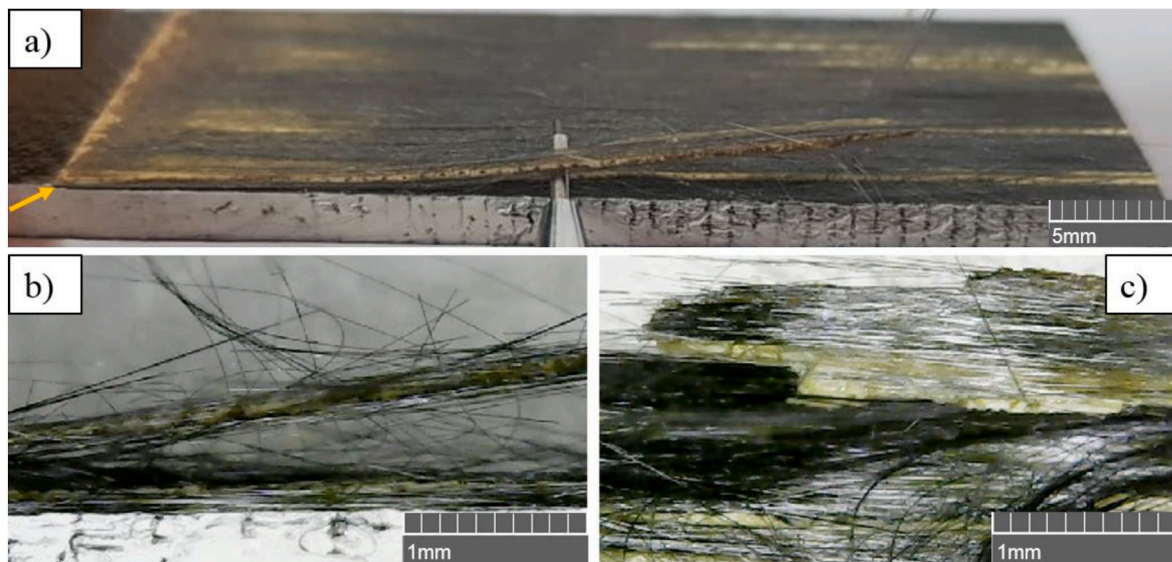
SB joint fracture surface of the S1 specimen's side tested at ETW condition under Mode I load. a) Lateral image of the specimen. b) Fibre bridging and c) Adhesive failure.
